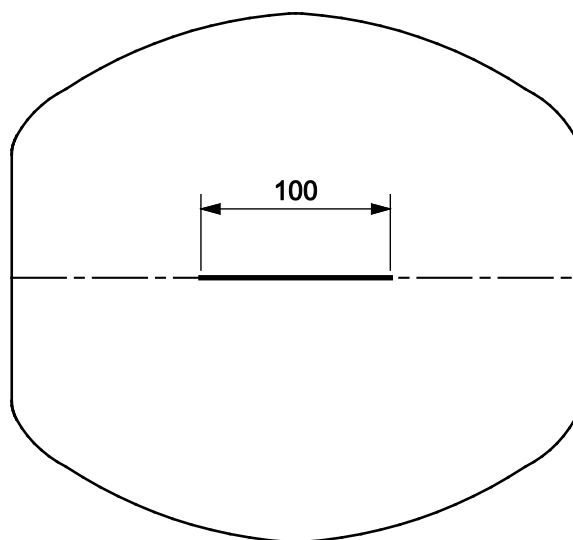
Extent of radiography of welds – Cylinders with circumferential welds only
